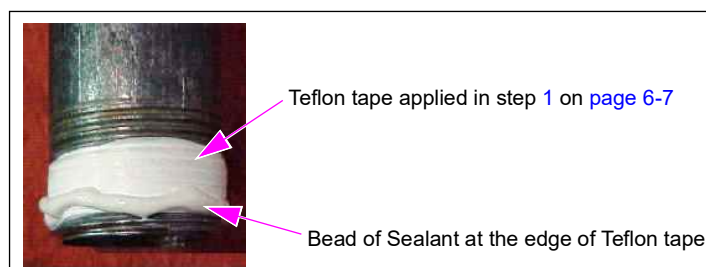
Inlet Pipe Wrapped with Teflon Tape
